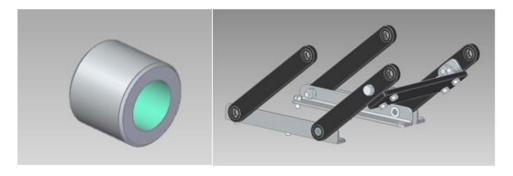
Left, M10-threaded bushing for scissor arms. Right, bushing mounted inside front scissor arms.
